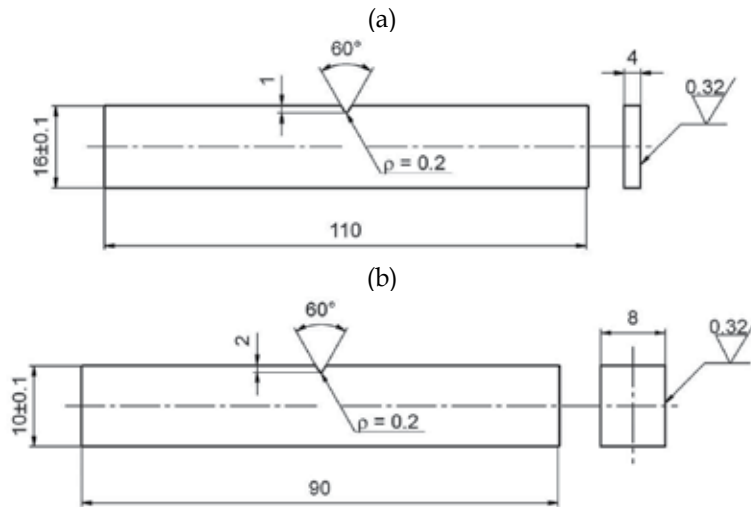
Shape and dimensions of specimen, dimensions in mm for: (a) bending, (b) bending with torsion
